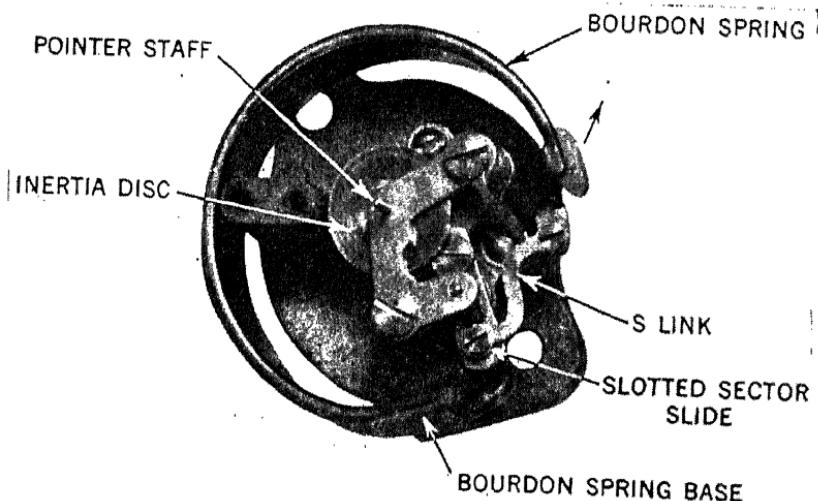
Ashcroft Oil Pressure Gauge Mechanism
